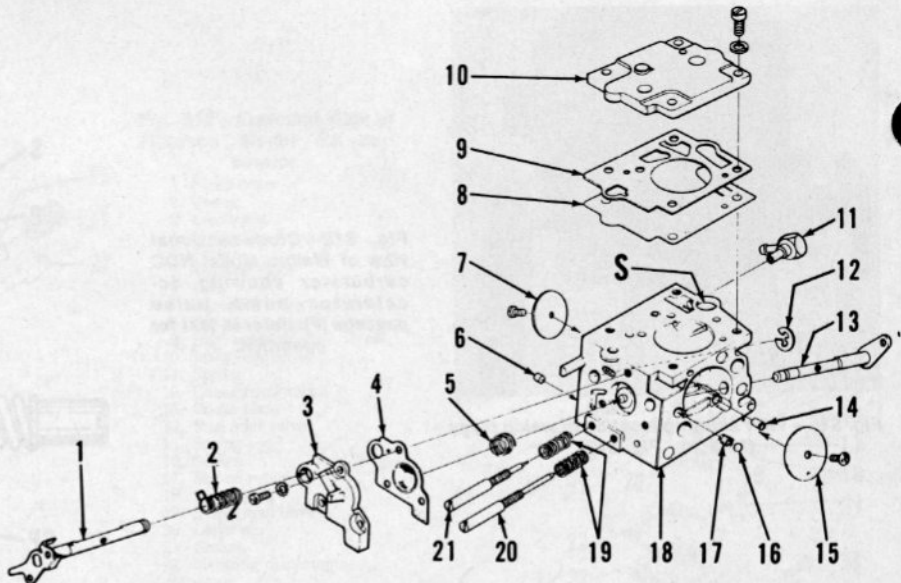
Exploded view of Walbro Model SDC carburetor with accelerator pump assembly. Refer to Fig. S20 for metering diaphragm assembly.
